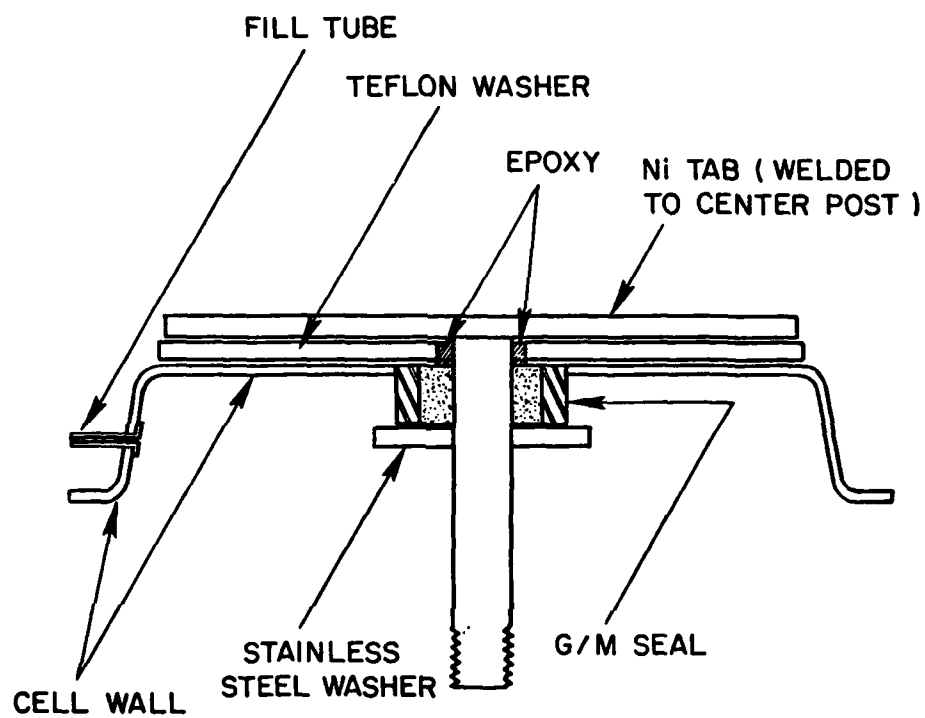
Top of hermetically sealed flat cell showing G/M seal, nickel tab and fill tube.
